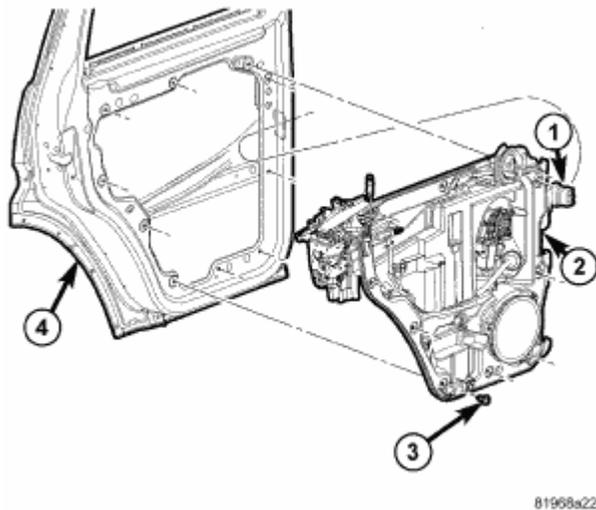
Electrical Connector, Carrier Plate, Screws & Door
